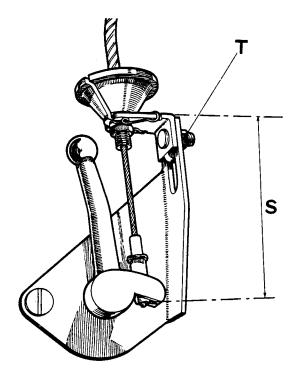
RAMSHAFT CABLE ATTACHMENT
